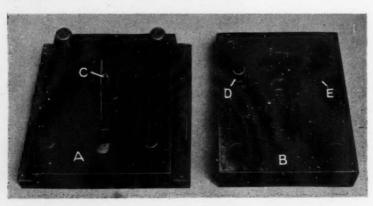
Single-impression Tool for Producing the Die Cast Gear Drum Component Seen in Fig. 8
